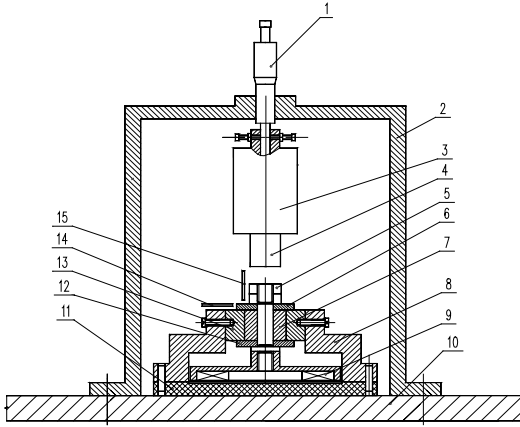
Schematic of Spindle Vibration Test Setup. 1. micrometer 2. frame 3. load sensor 4. magnet 5. nut 6. upper thrust bearing 7. journal bearing 8. bearing support 9. motor rotor 10. base 11. motor stator 12. lower thrust bearing 13. bearing bush 14&15. displacement probes.
